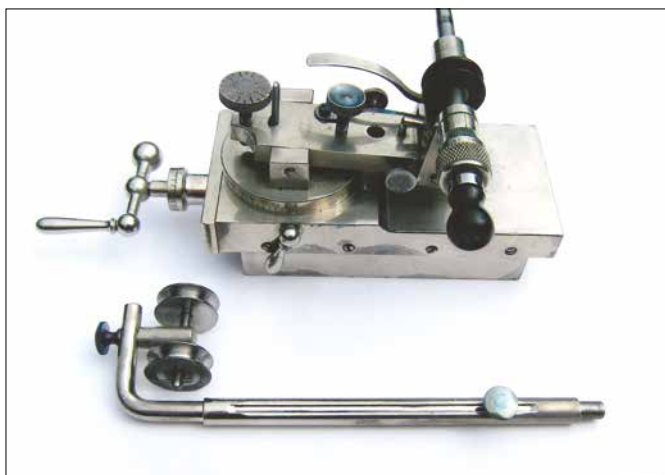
The pivot polisher is driven from the lathe overhead drive.
